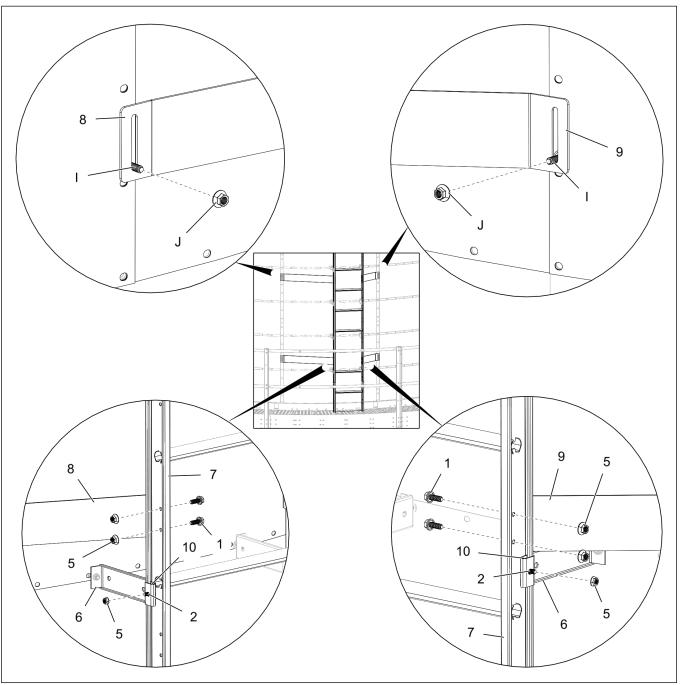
Installing the ladder stand-off and ladder brace brackets at eave platform
